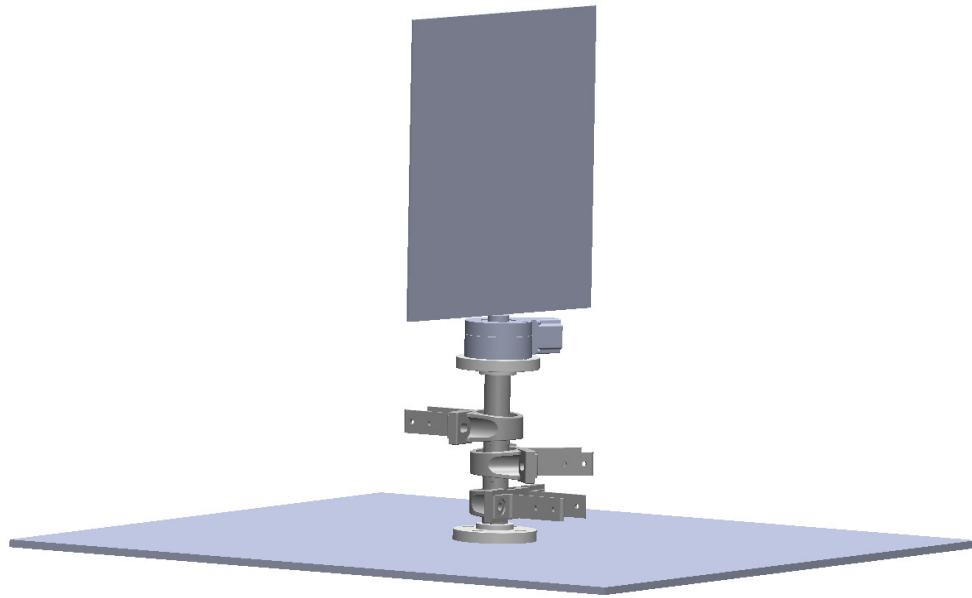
Final Solidworks design model of subsystem 1: base and central mount assembly.
